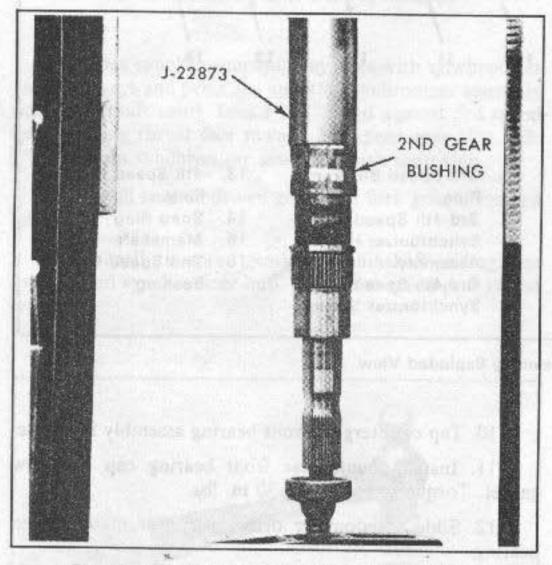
B-16L-Installing 2nd Speed Gear Bushing
